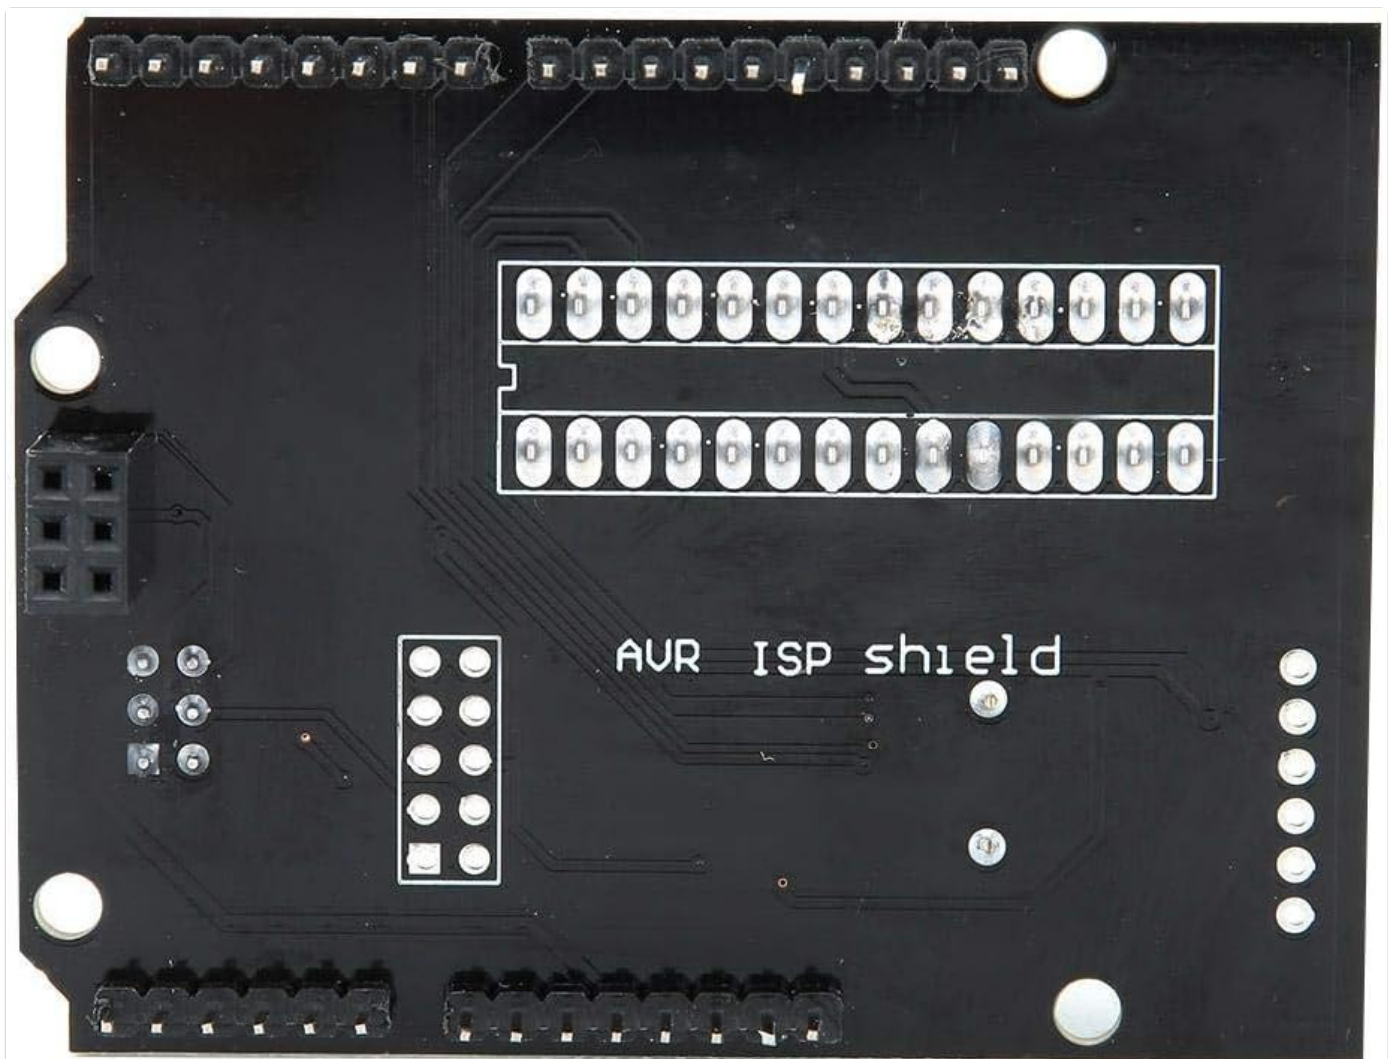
Bottom view of the Walfront Programmer Expansion Board, illustrating the solder points and circuit traces.
